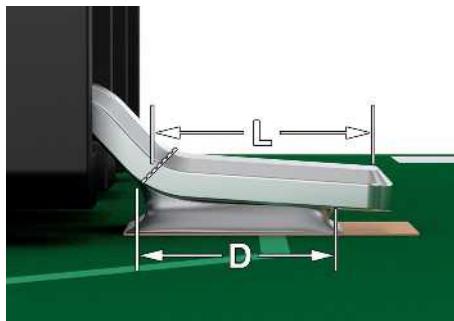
Flat gullwing connections, minimum length of the soldering spot at the side (D)
